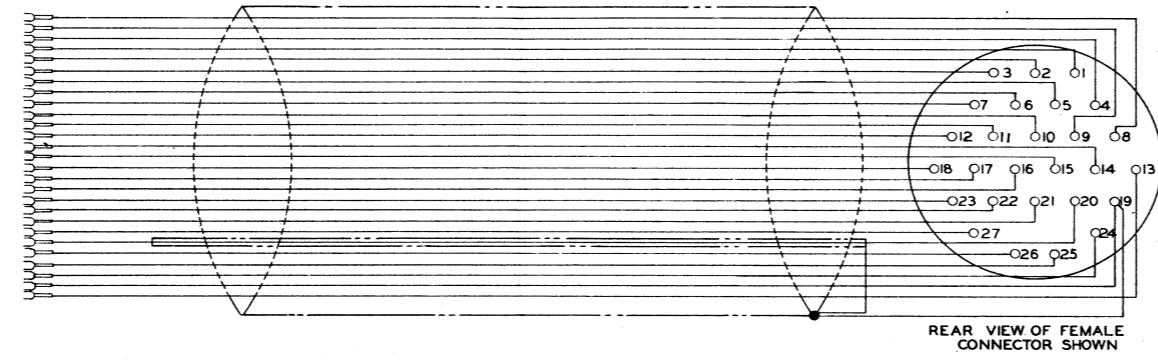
65X-9 Antenna Loading Coil Cable Assembly Diagram
